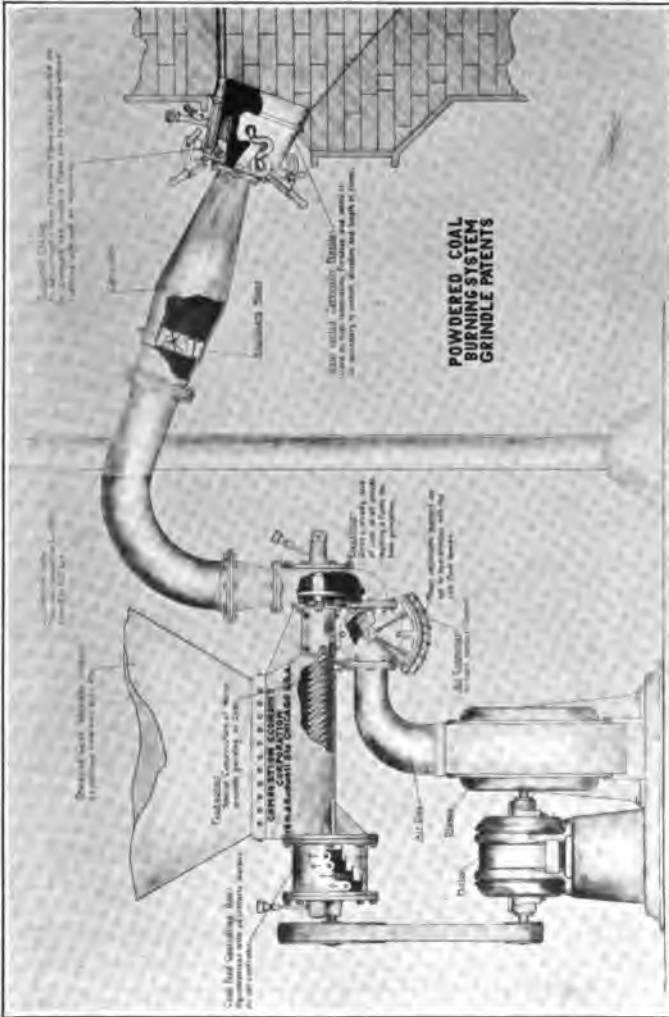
Burner and feeding mechanism for malleable iron melting furnace.
